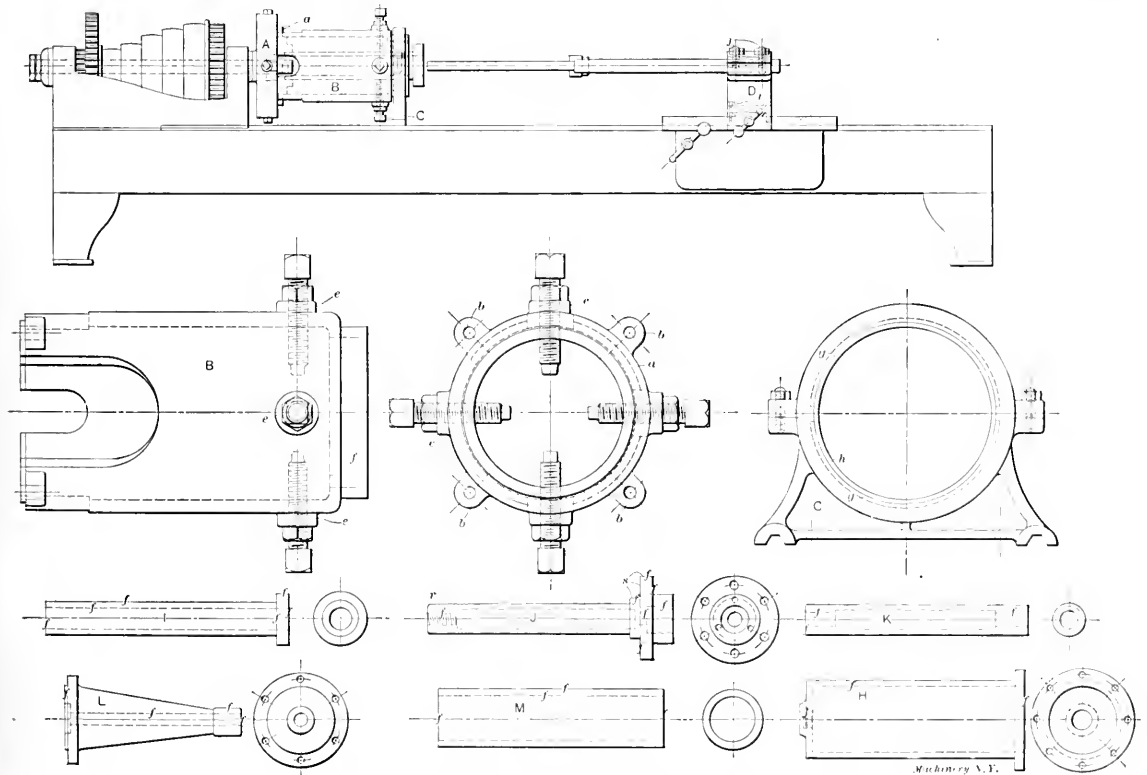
A Lathe Rigged up as a Boring Machine, and some of the Work Done with It.
